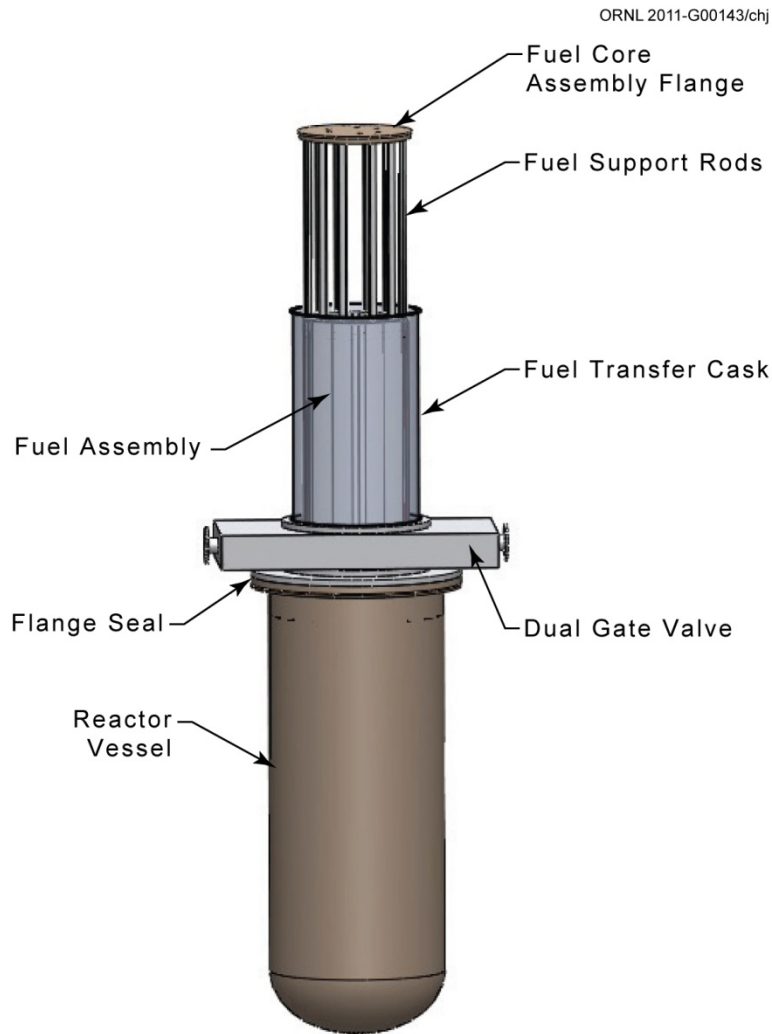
SmAHTR core withdrawn into fuel transfer cask.
